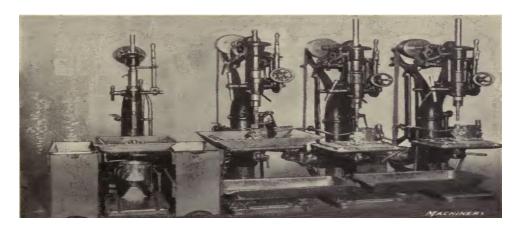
Vertical drilling machines equipped with indexing fixtures for drilling universal joint rings
